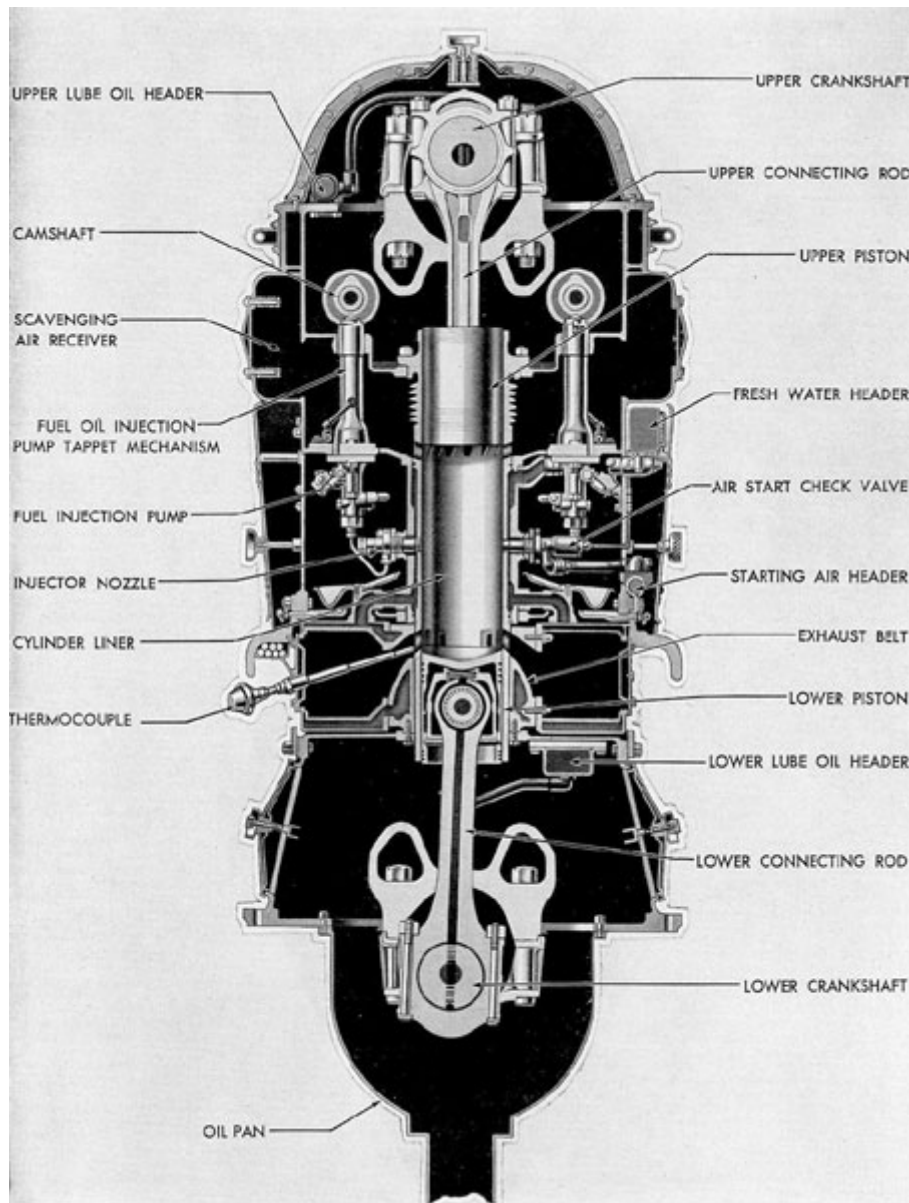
Cross section of F-M 38D 8 1/8 engine.
